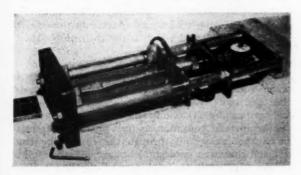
Hot tear testing machine and casting with drag half of core sand mold in place.
